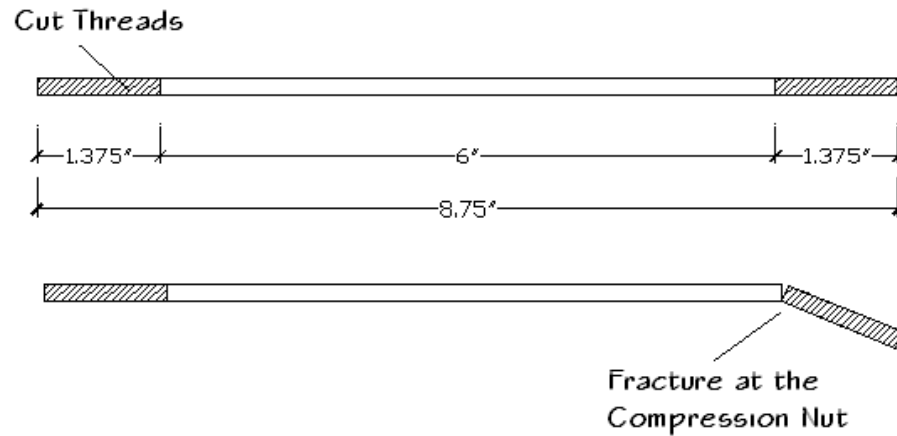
SMA/Nitinol Rods used on the HPCE, Dimensions and Fracture Failure.
